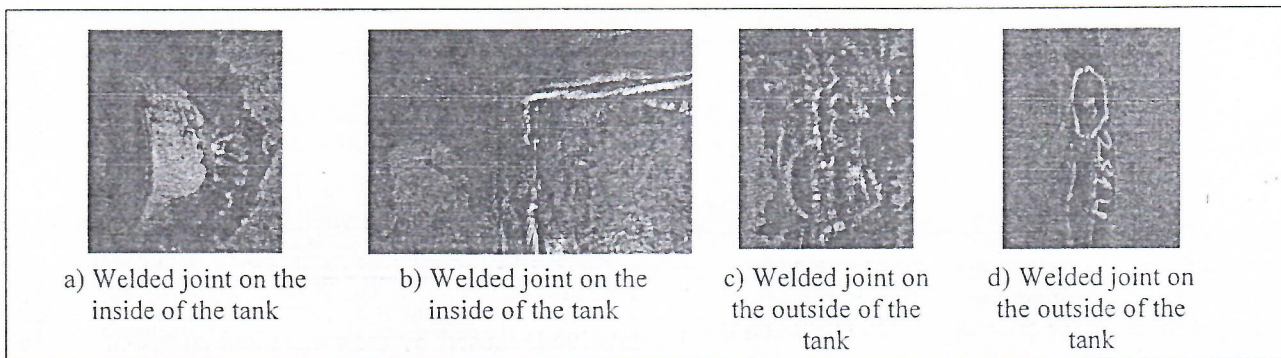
Appearance of discontinuous and incompletely welded joints
